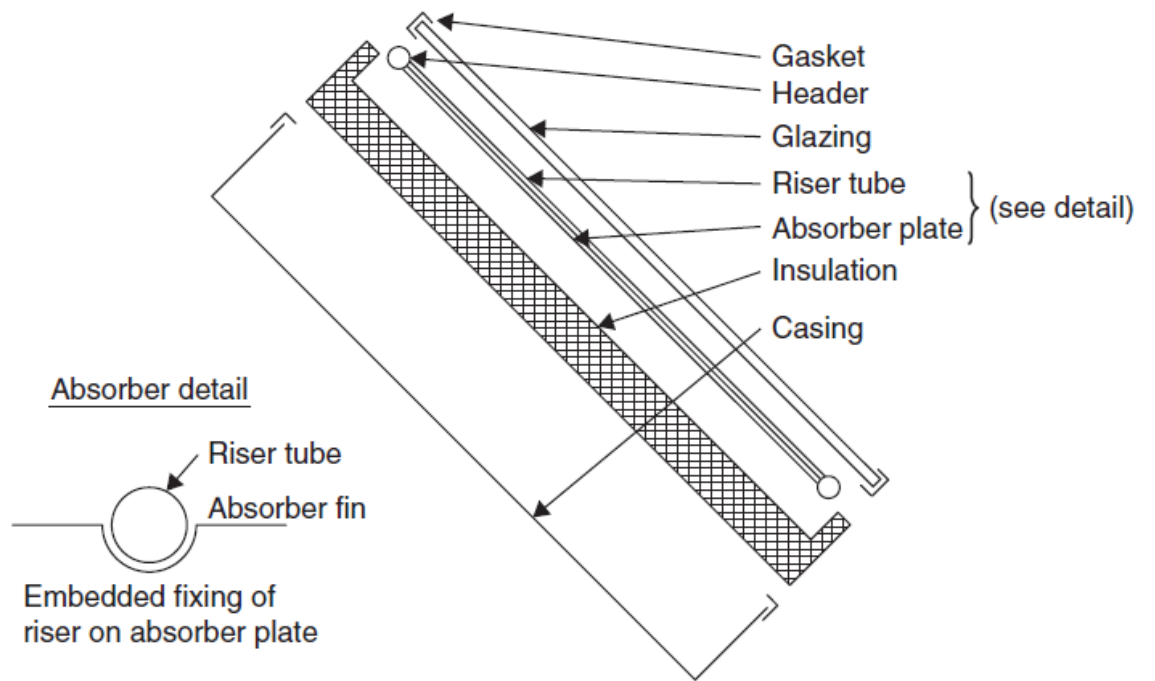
Exploded view of a flat plate solar collector and absorber details [12].
